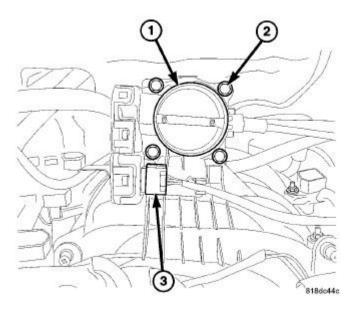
THROTTLE BODY 3.7L Courtesy of CHRYSLER LLC
